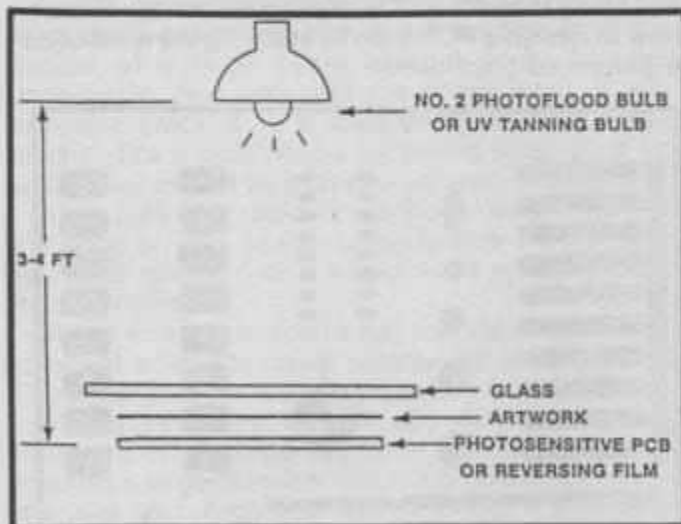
This contact-printing setup can be used to expose either a photosensitive PCB or a sheet of reversing film.
